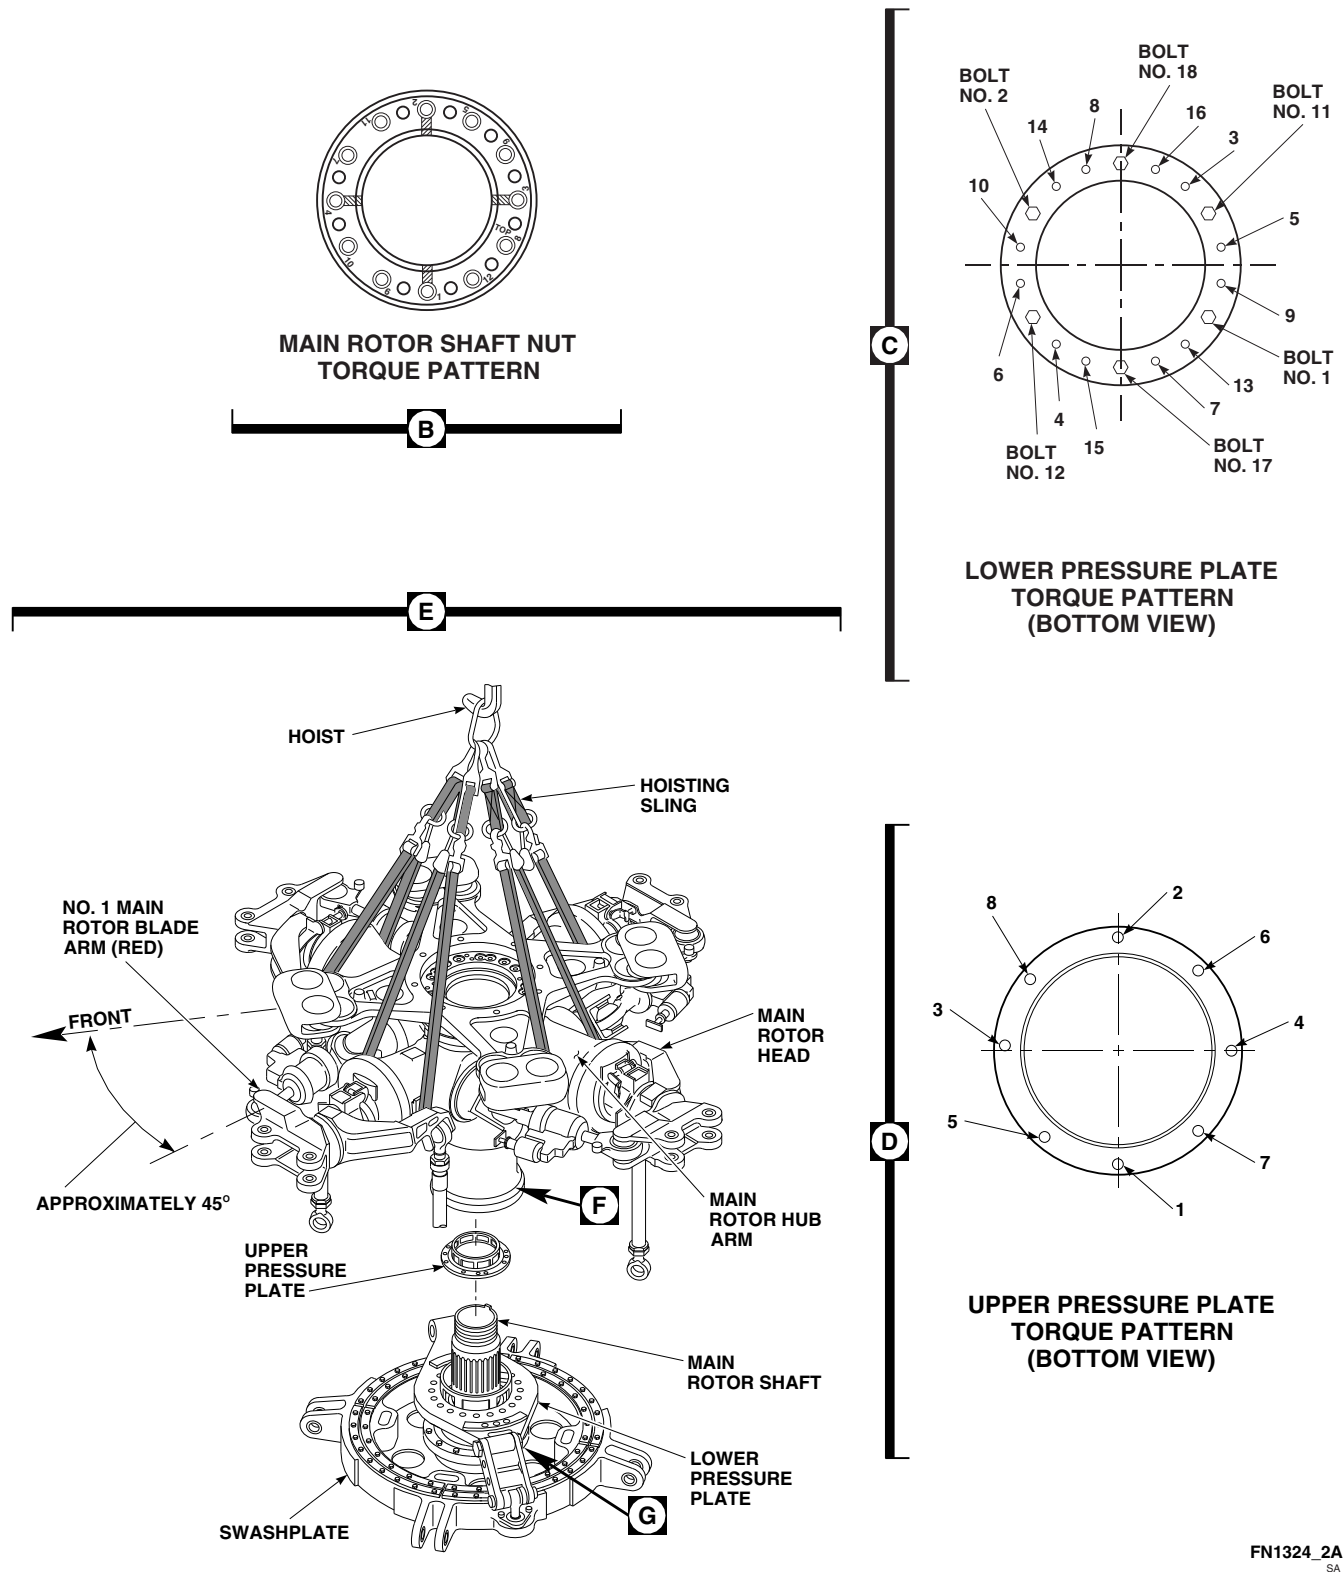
REPLACE MAIN ROTOR HEAD AND SHAFT EXTENSION (SHEET 2 OF 5)
